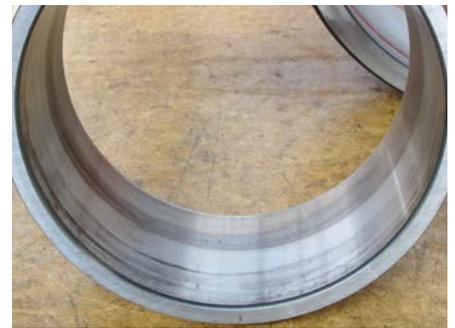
The condition of the large bore diameter side inner ring face is as good as new.
